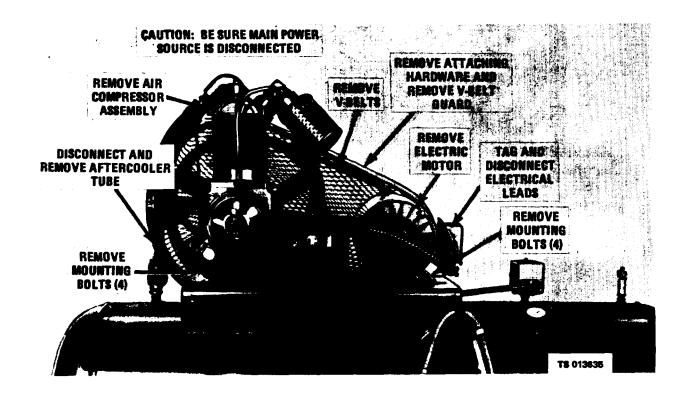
Electric motor and compressor assembly, removal and installation.
